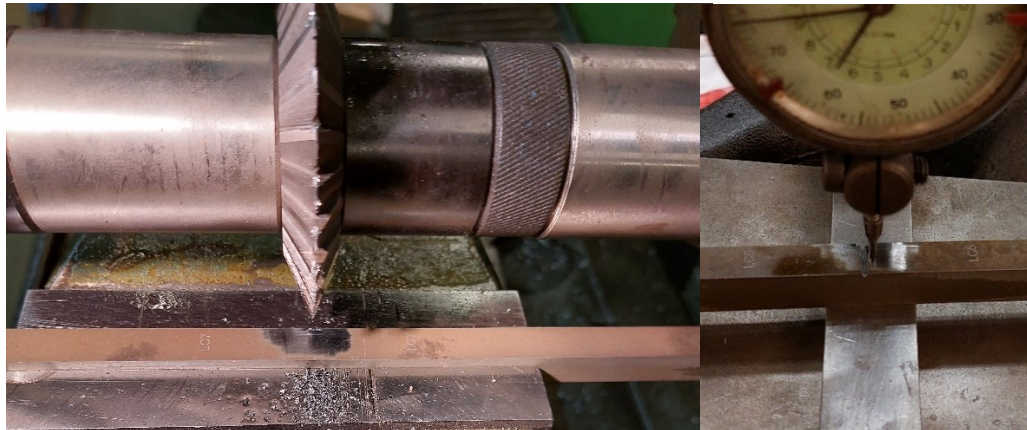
Side grooving equipment and a clock dial intended for Charpy V notch measurement used to guide the machining.
